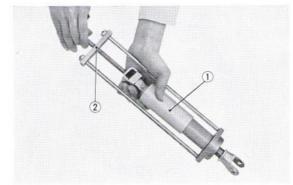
(1) Rear cushion assembly (2) Rear cushion assembling & disassembling tool
